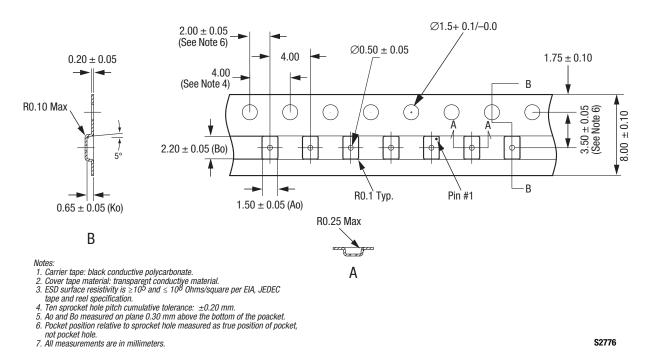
SKY65601-477LF Tape and Reel Dimensions
